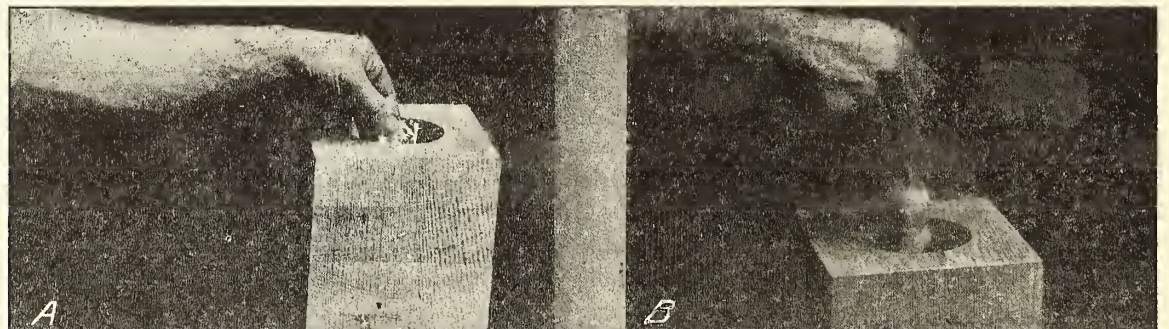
Aluminum leaf coating. (a) Applying leaf to large hub hole. (b) Smoothing off leaf in large hub hole.
